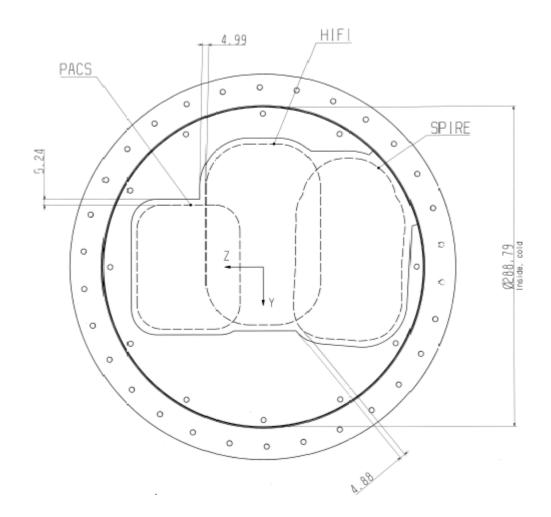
Instrument Beams at TS2 entrance baffle Aperture (591.7mm from focal plane)
